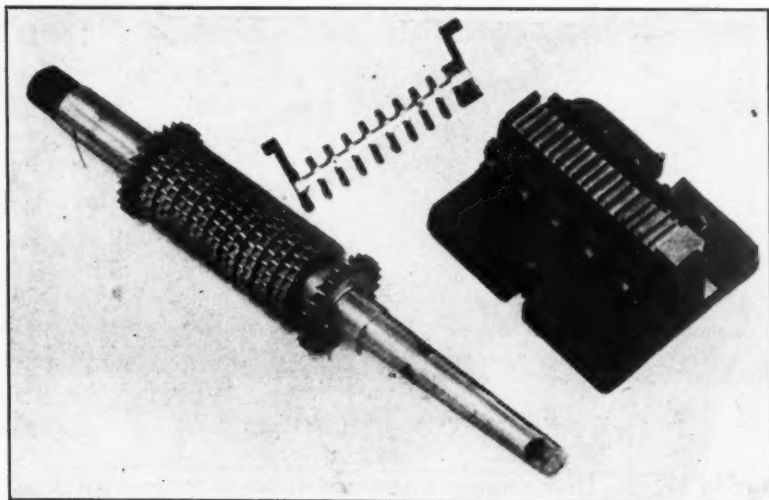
MILLING FIXTURES AND GANG CUTTERS FOR A 48 AND 48 A
